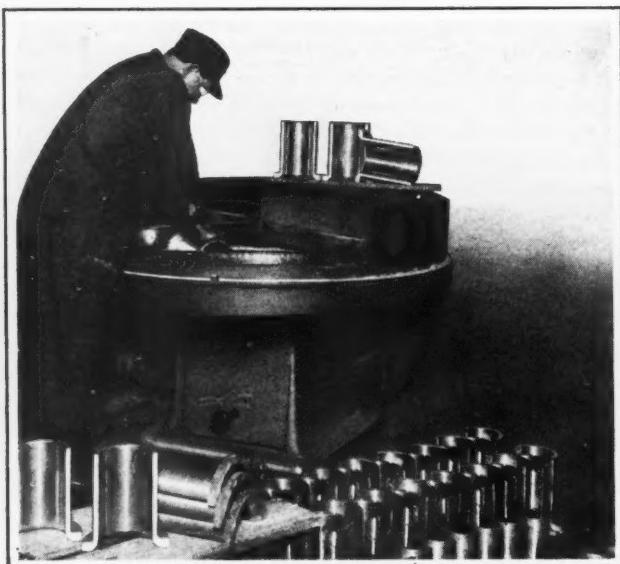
Grinding Bronze Motor Axle Bearings on a Disk Grinder
